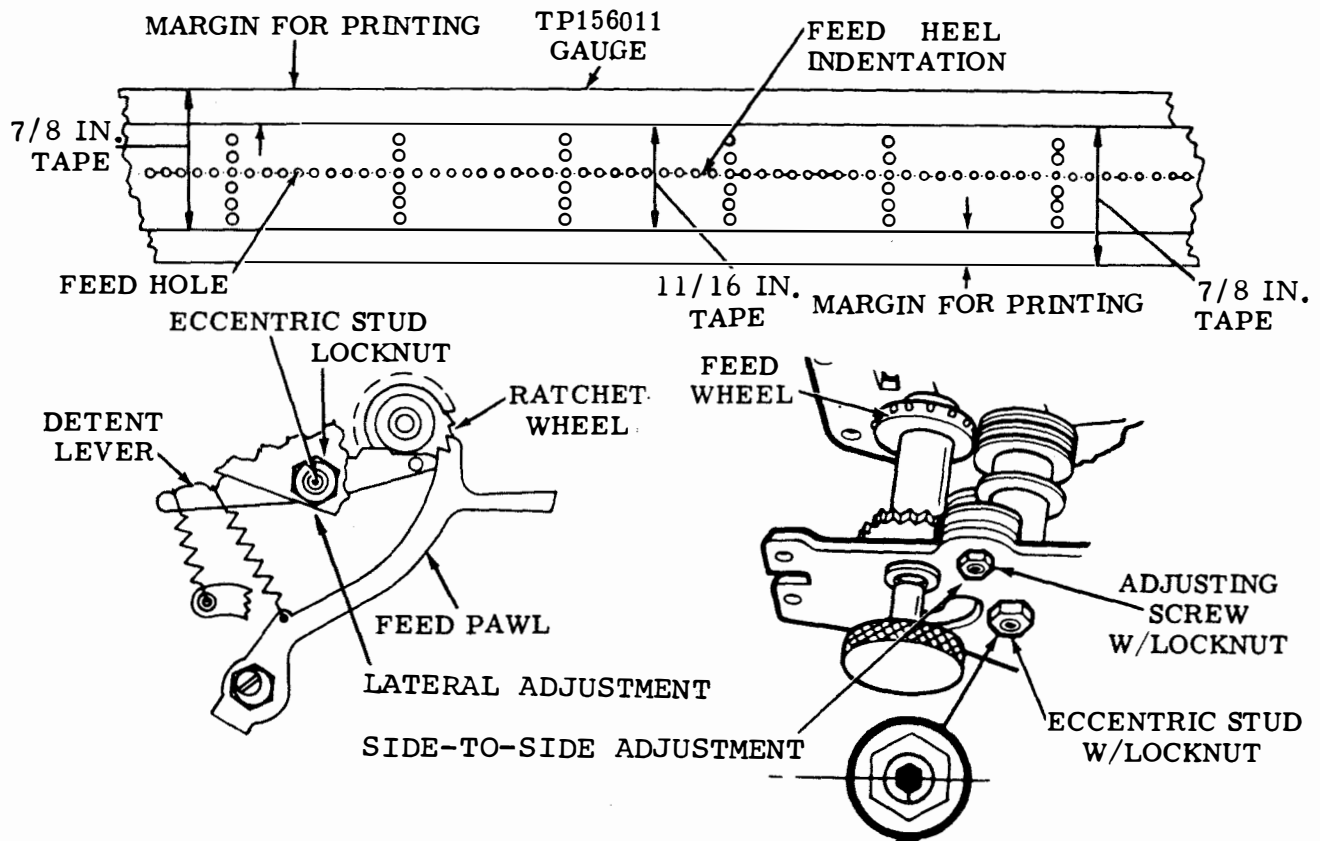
Lateral and Front-to-Rear Feed Wheel Position Detent (For Fully Perforated Tape With Indentation of Feed Holes), Front View
